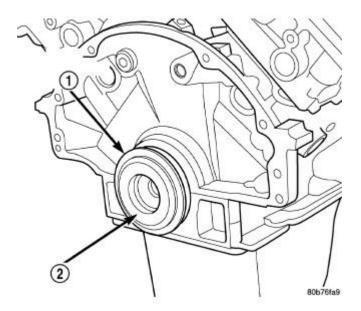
Crankshaft Rear Oil Seal Guide Special Tool 8349-2 and Oil Courtesy of CHRYSLER LLC
